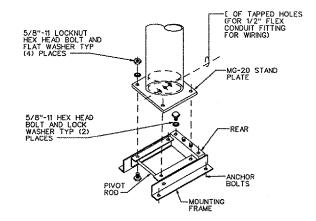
MOUNTING STAND ASSEMBLY MG-20
